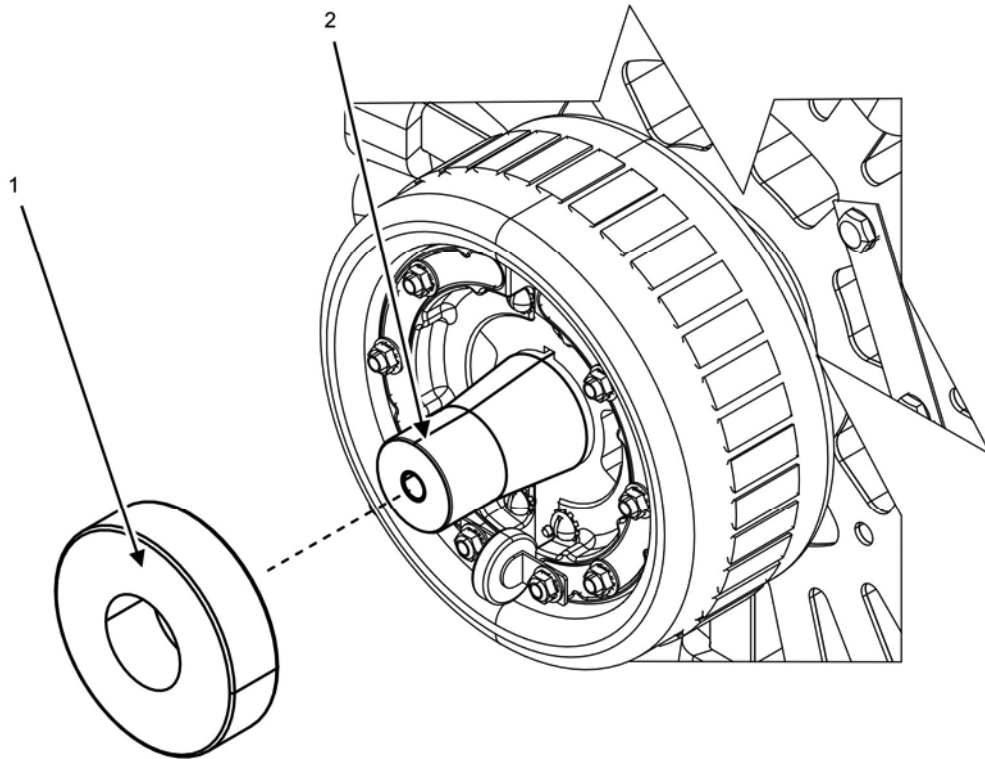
50/60 Hz Generator Bearing Removal — Detail.
